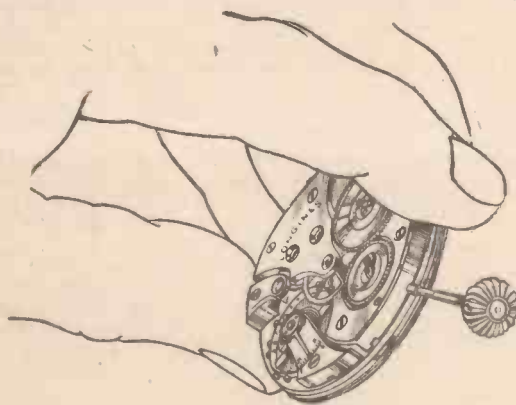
Insert the winding stem, lock the bolt down and check for wind and set hands.
